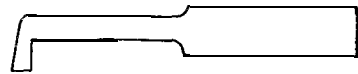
Recessing tool-To use this for boring, it should be set slightly askew
